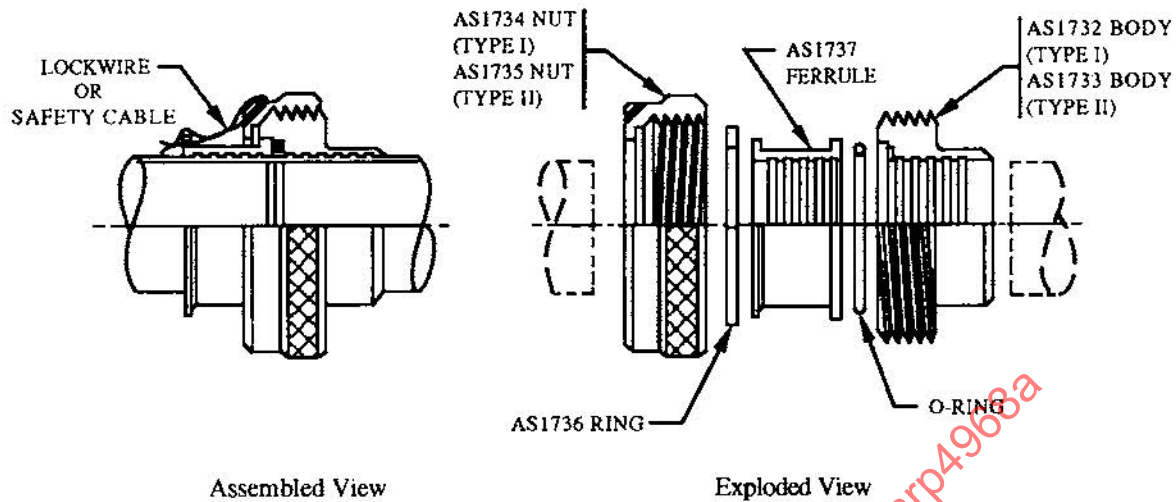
Assembly of Rigid Type Coupling (AS1731)
